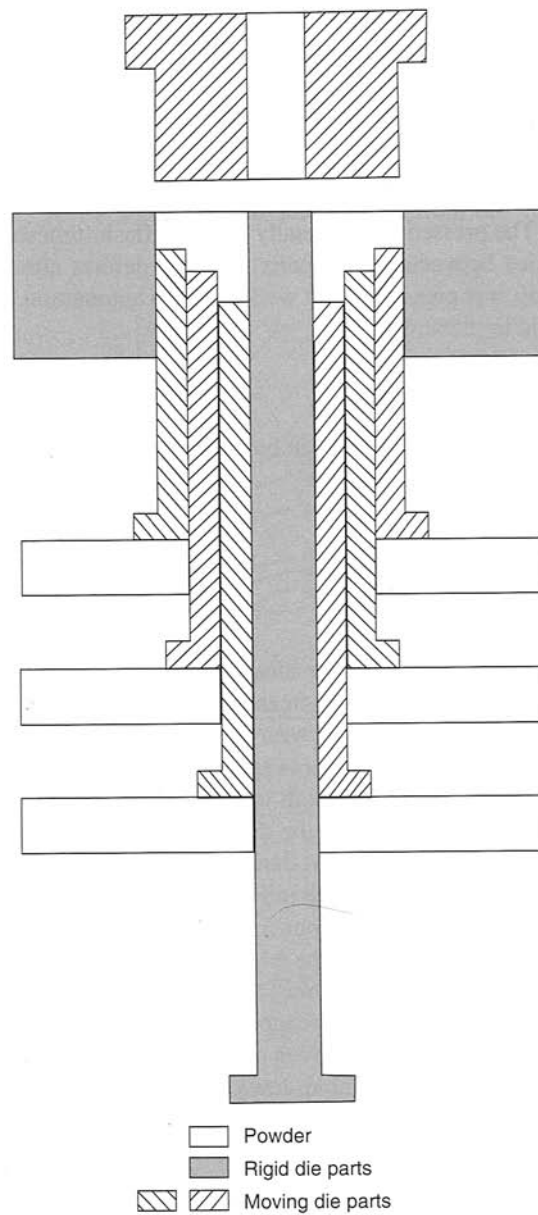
Schematic of tooling to uniaxially press a three-level part. (Drawing courtesy of ASM International.)
